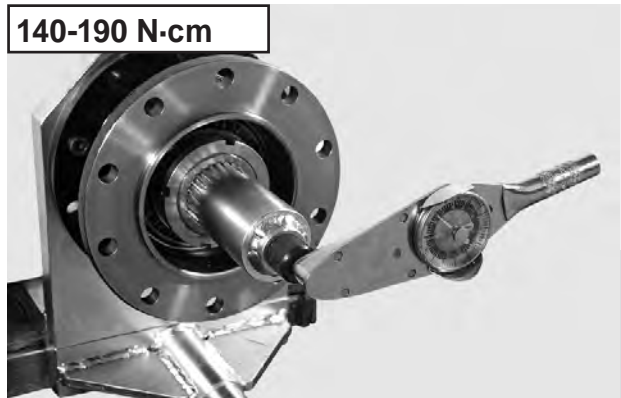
Apply onto the pinion (18) the special tool T1 (See drawing T1 p. 77) and with the help of a torque meter, check the torque of the pinion (18).
